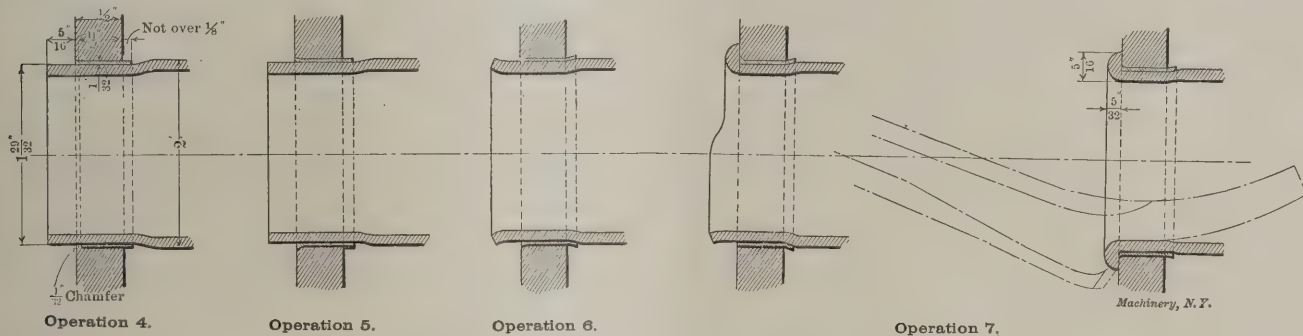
Union Pacific Railroad Method of Setting Boiler Tubes.
